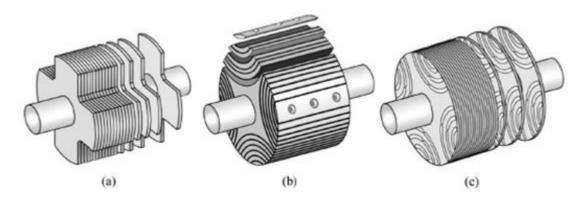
Different rotor designs for reluctance motors. (a) is for high speed design, (b) complicated to manufacture. (c) is electrically superior.
